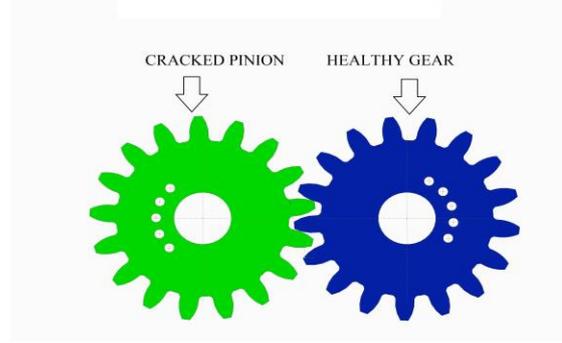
Creo 3D Model of Cracked Spur gear Pair
